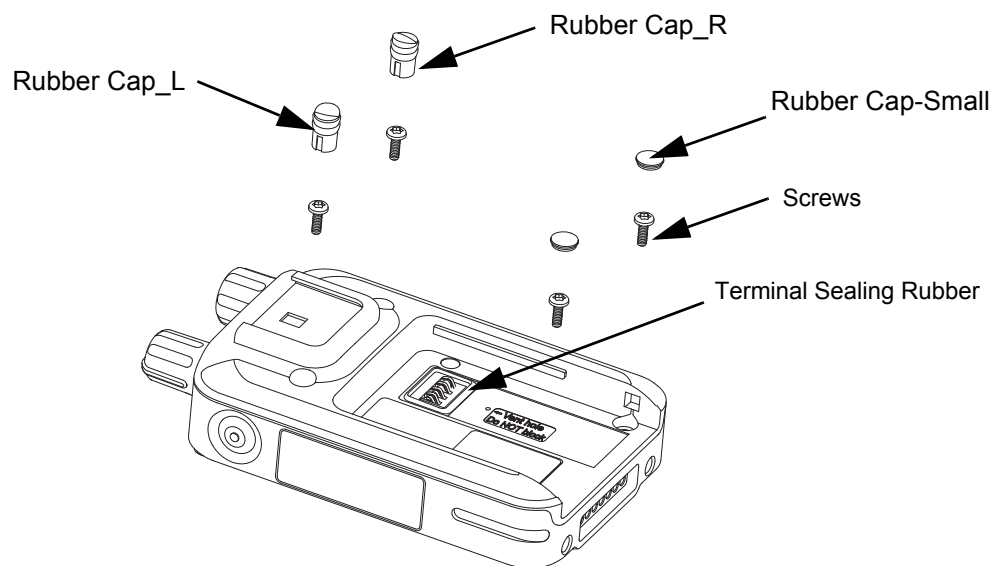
Assembling the Back Housing Kit to the Front Housing Kit
